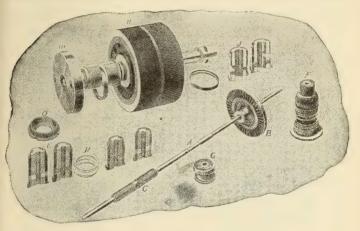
WORKING PARTS OF THE DE LAVAL STEAM TURBINE.
